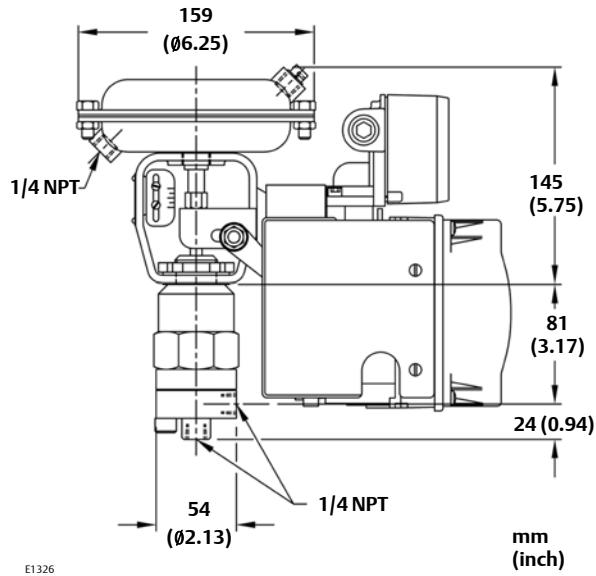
81000 Inline Valve with Baumann 16 Actuator and FIELDVUE DVC6000 Digital Valve Controller
